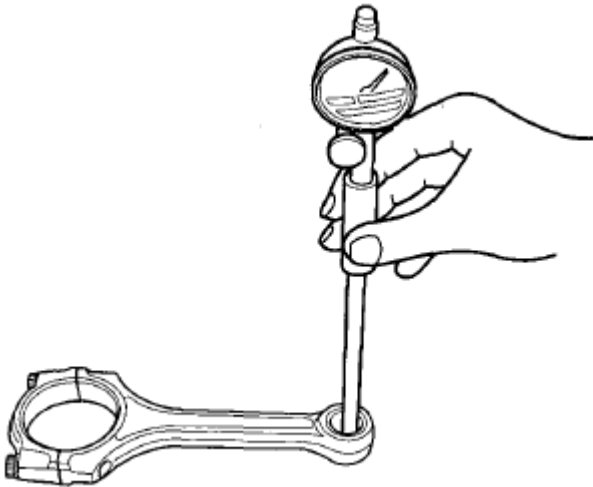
Measuring Piston Pin-To-Connecting Rod Clearance
